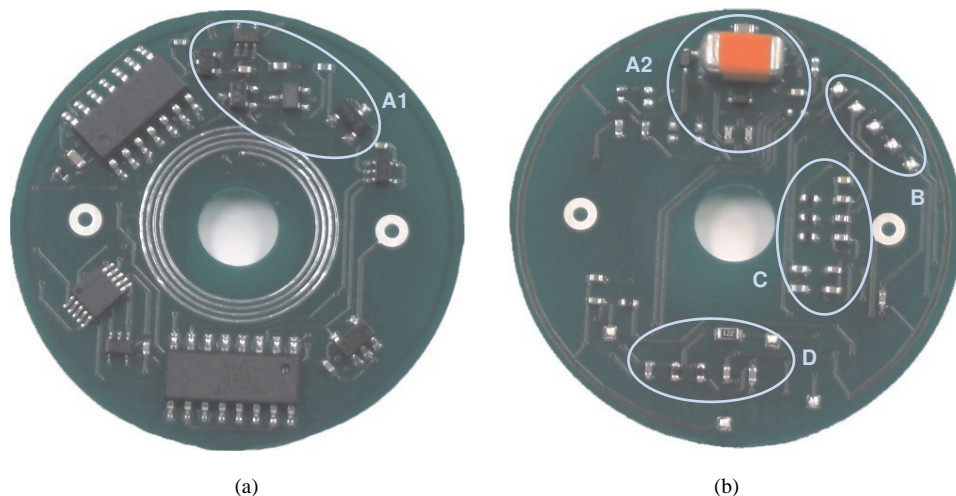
The realized RFID-based impedance measurement tag. (a) Bottom side. Notice the 4-turn RF-coil as an integral part of the PCB. (b) top side. Connectors will be soldered on the pads on the left and the right side. The PCB has an outer diameter of 34 mm and a hole with 6 mm diameter for microscopic inspections of an attached sensor.
